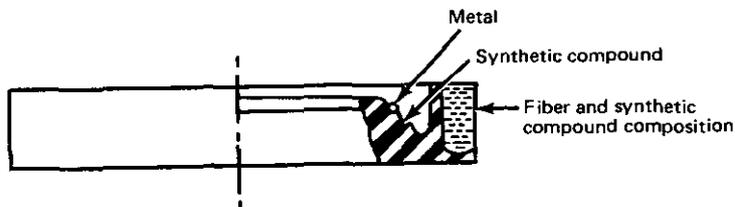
OIL SEAL, NONMETALLIC SHELL CONSTRUCTION
